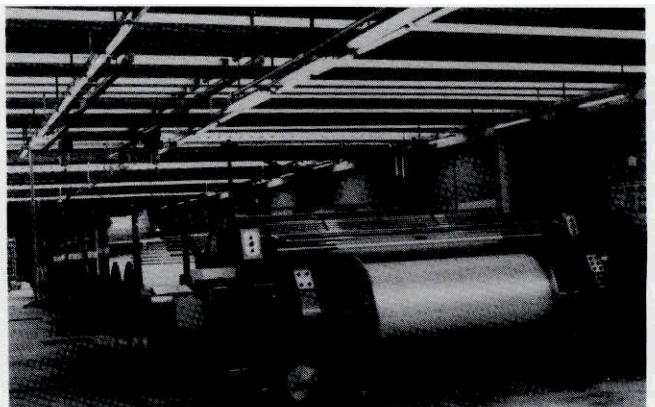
Raion FCT/3000 - Primary beams assembling machine (Rieti unit)
